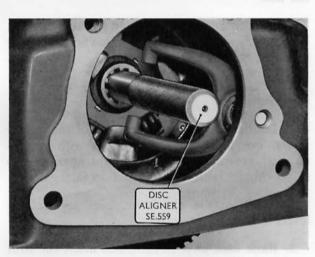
Align clutch disc prior to tightening the clutch cover bolts evenly to the specified torque
